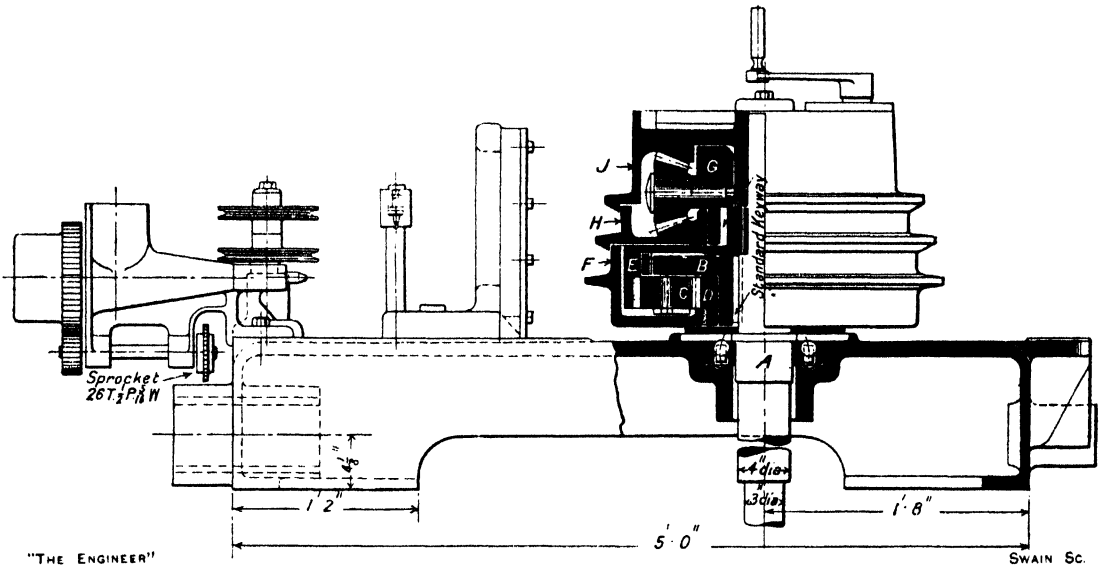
20 IN. THREE-HOLE CONTINUOUS MACHINE—BARRON AND CROWTHER.
